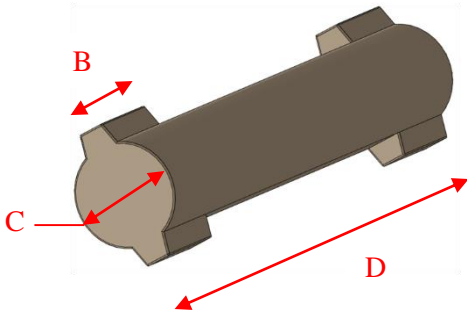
Disassembled rapid prototyping model of the PIP joint protractor hinge device.
